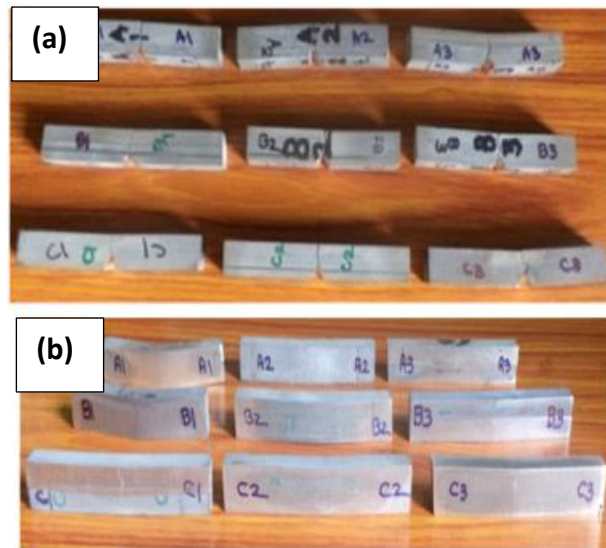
Fractured MMC specimens after (a) impact test; and (b) three point bend test (Das et al., 2019)
